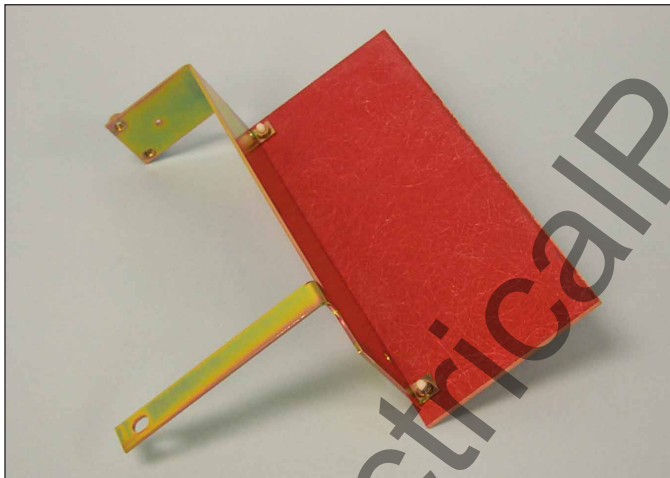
Insulation Barrier Installed on the Trip Unit Mounting Bracket (LAF-1600 B).
